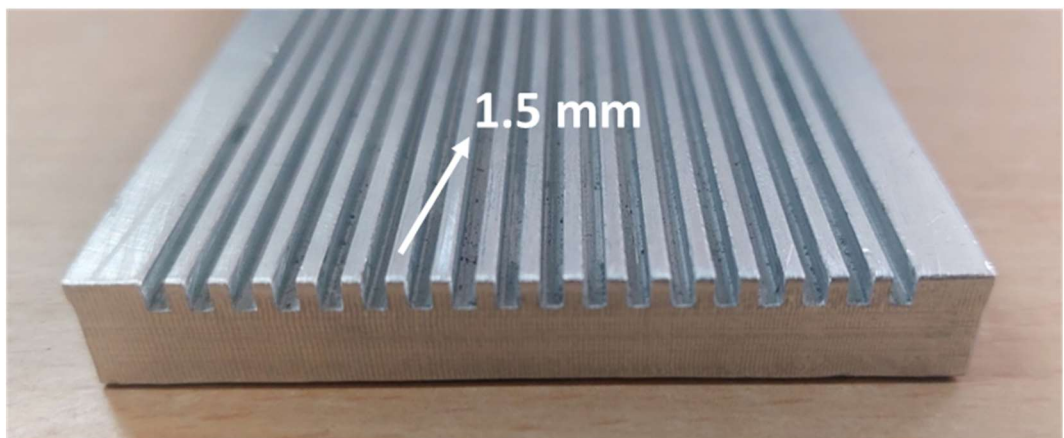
Machined aluminium base plate for 1.5 mm channel width
